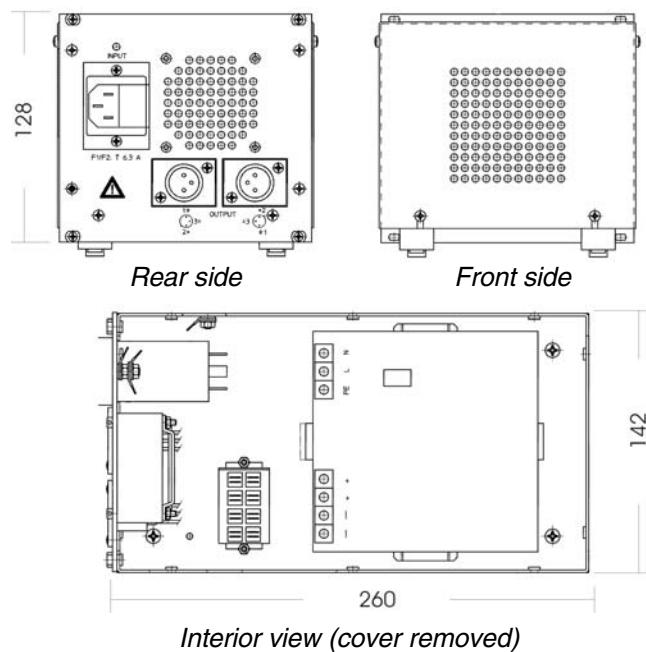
10 A Tabletop Power Supply Dimensions (approx. [mm])
